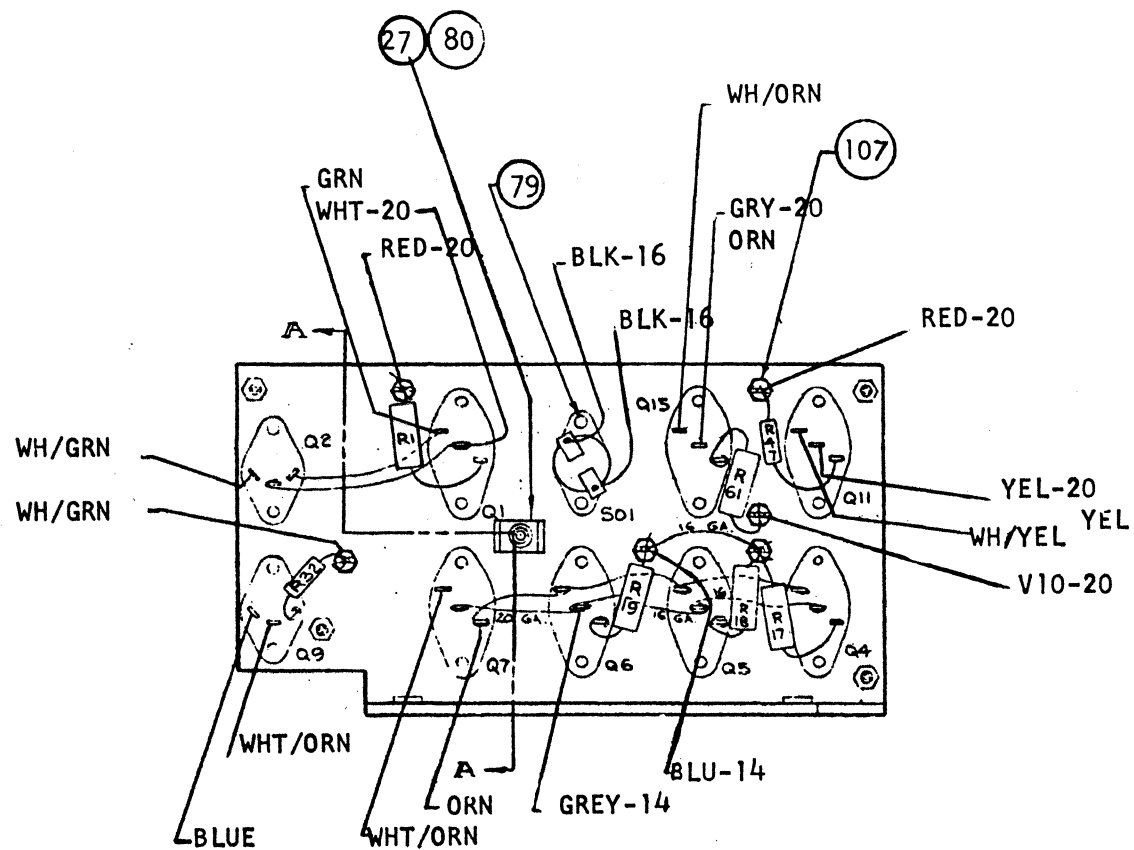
HEAT SINK ASSEMBLY (SHEET 5 OF 6)
